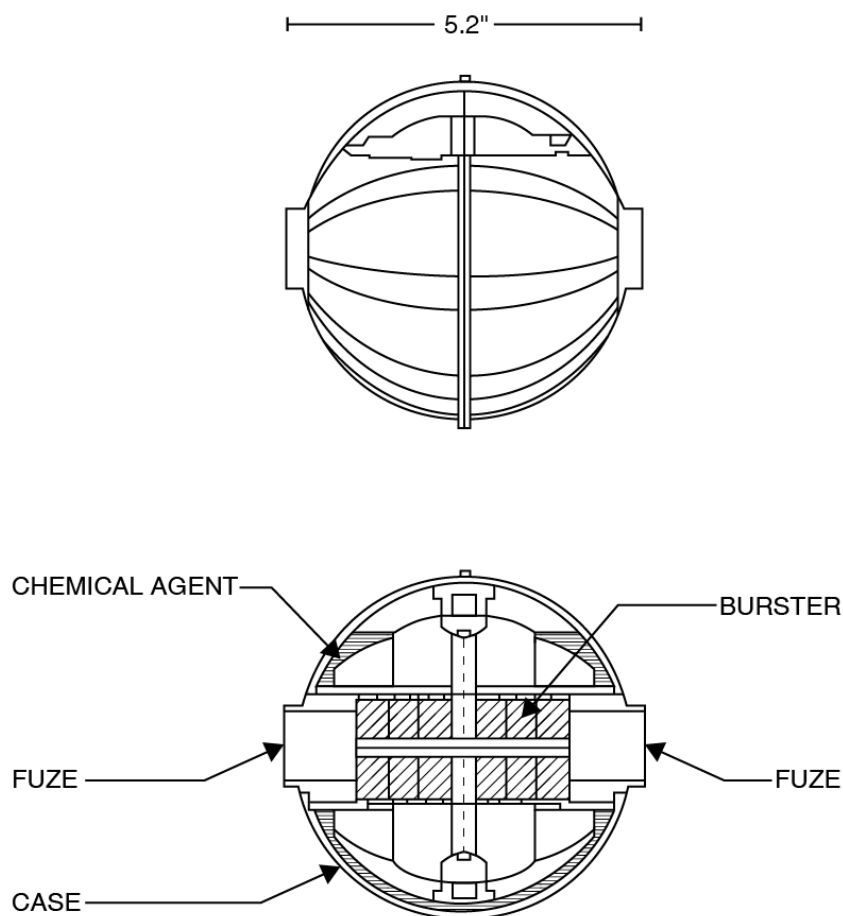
Bomblet, 5.2-inch, Spherical, E118 - Line Drawing
